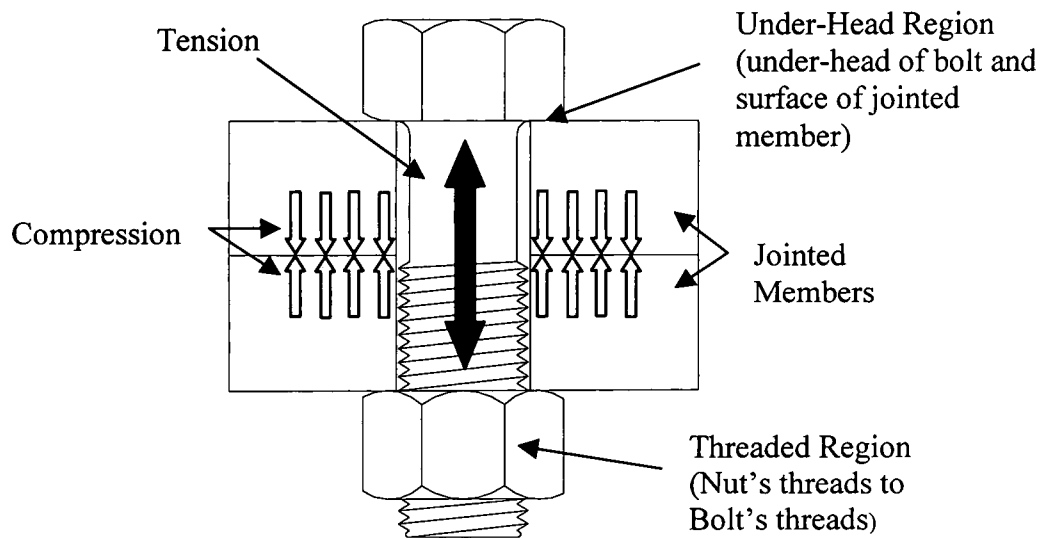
Schematic of a bolted joint showing compression in the jointed members and tension in the bolt.
